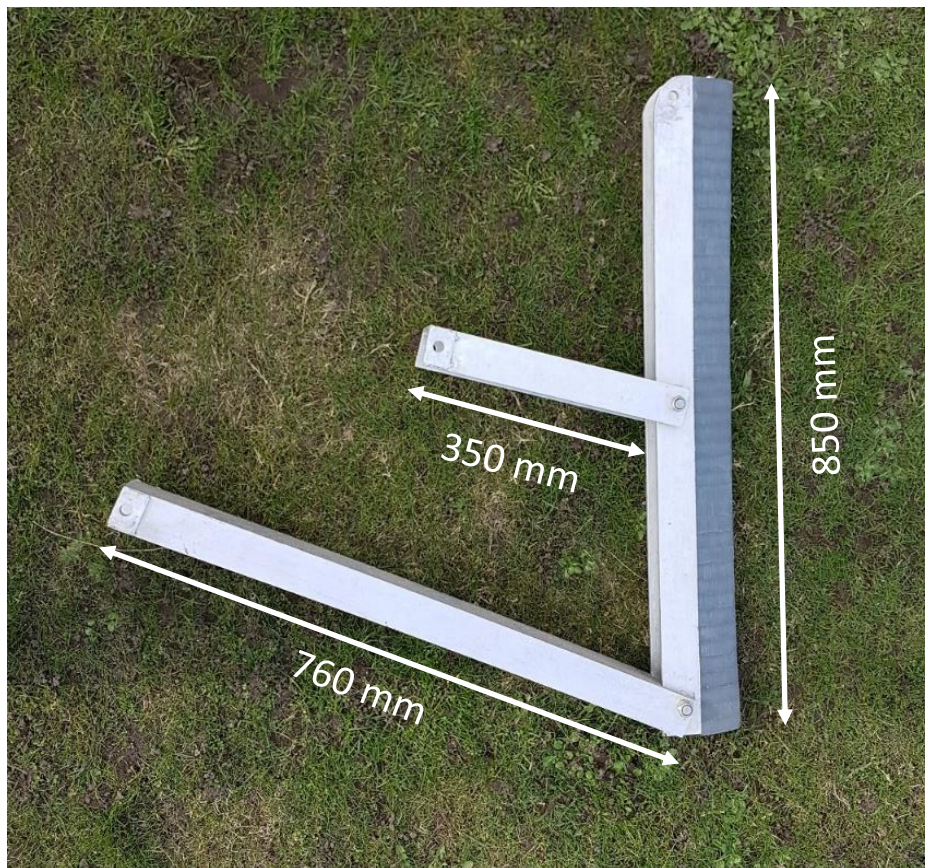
Profile of the turbine blade and its supports which were bolted to the keel of a jet-drive boat. The aluminium U-sections are 6 mm thick.
